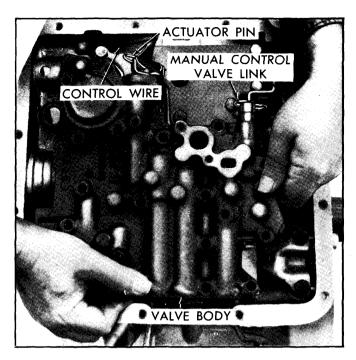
Removing Manual Control Valve Link, Valve Body and Detent Actuating Lever
